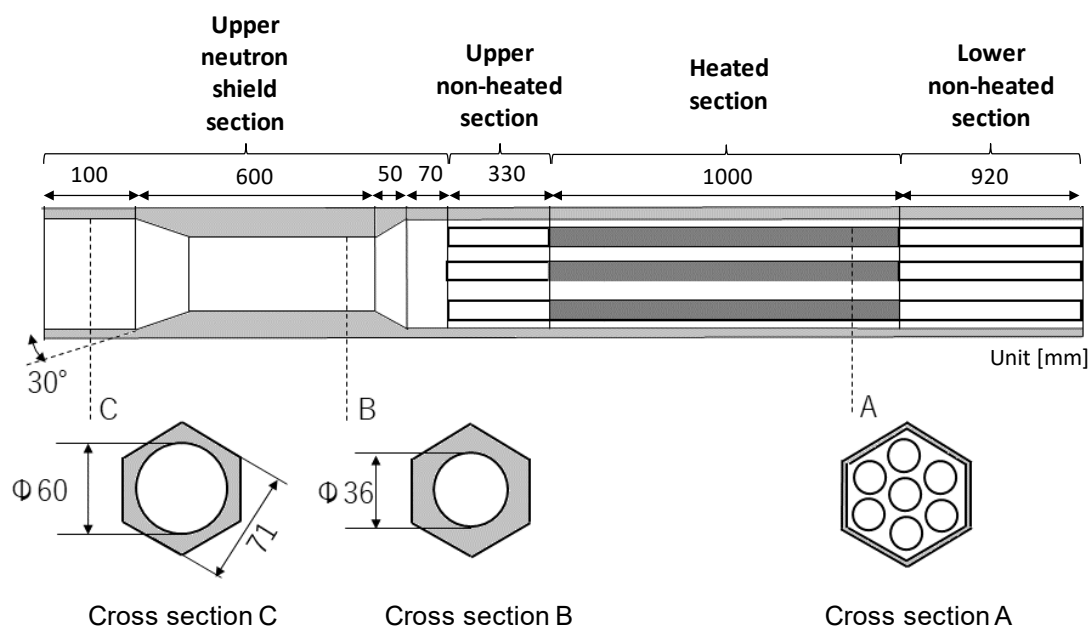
Dimensions of the inlet part of the simulated core with center and outer assemblies.
